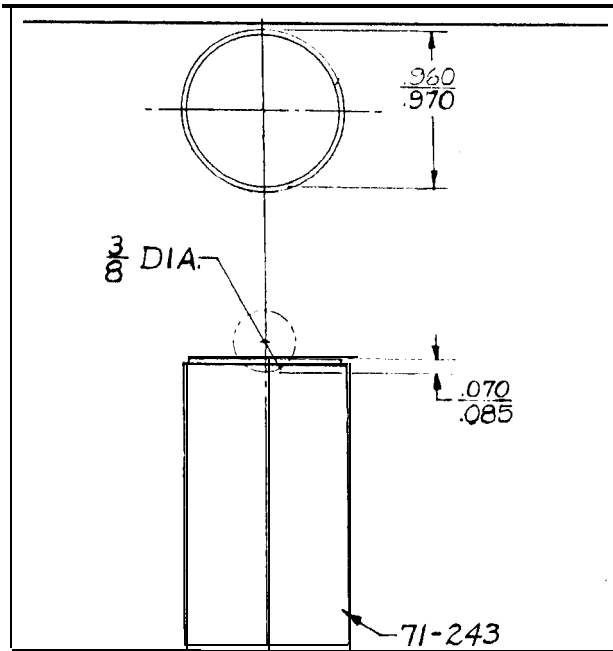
Reoperation to Eliminate Regulator Valve BUZZ
